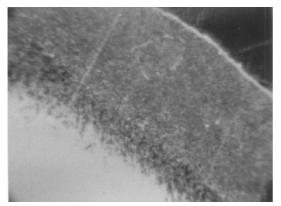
Fillet Weld with 5183 filler at 15X
